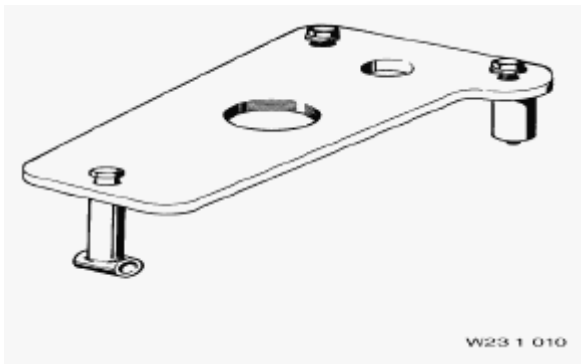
Fixture For Removing Rear Section Of Transmission Casing (23 1 010)
